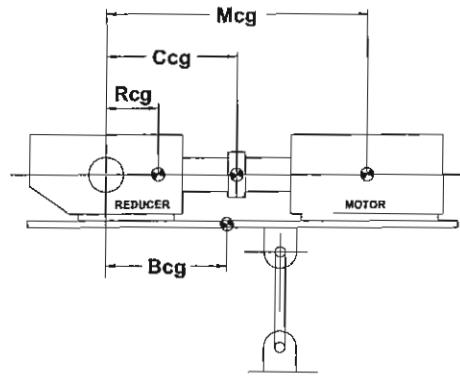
Sketch showing the side view of major drive assembly components and their associated centers of gravity
